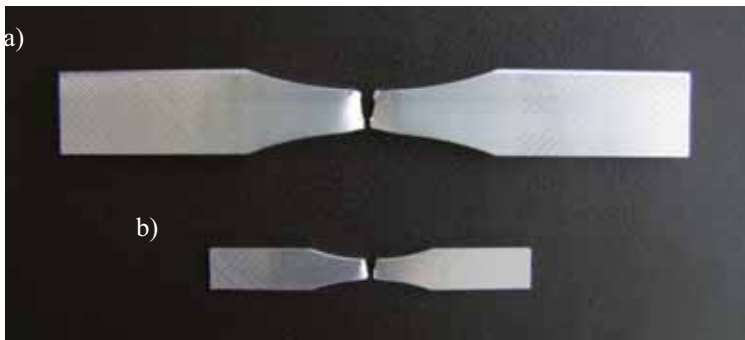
Photograph of the crack location: a) normative specimen; b) mini specimen
